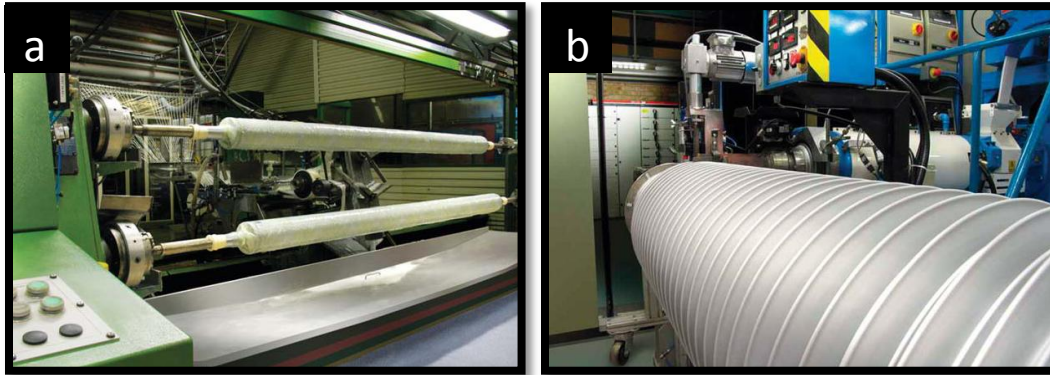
a: Winding machine for the production of FRP tubes - b: extrusion of the silicon housing onto the tube
